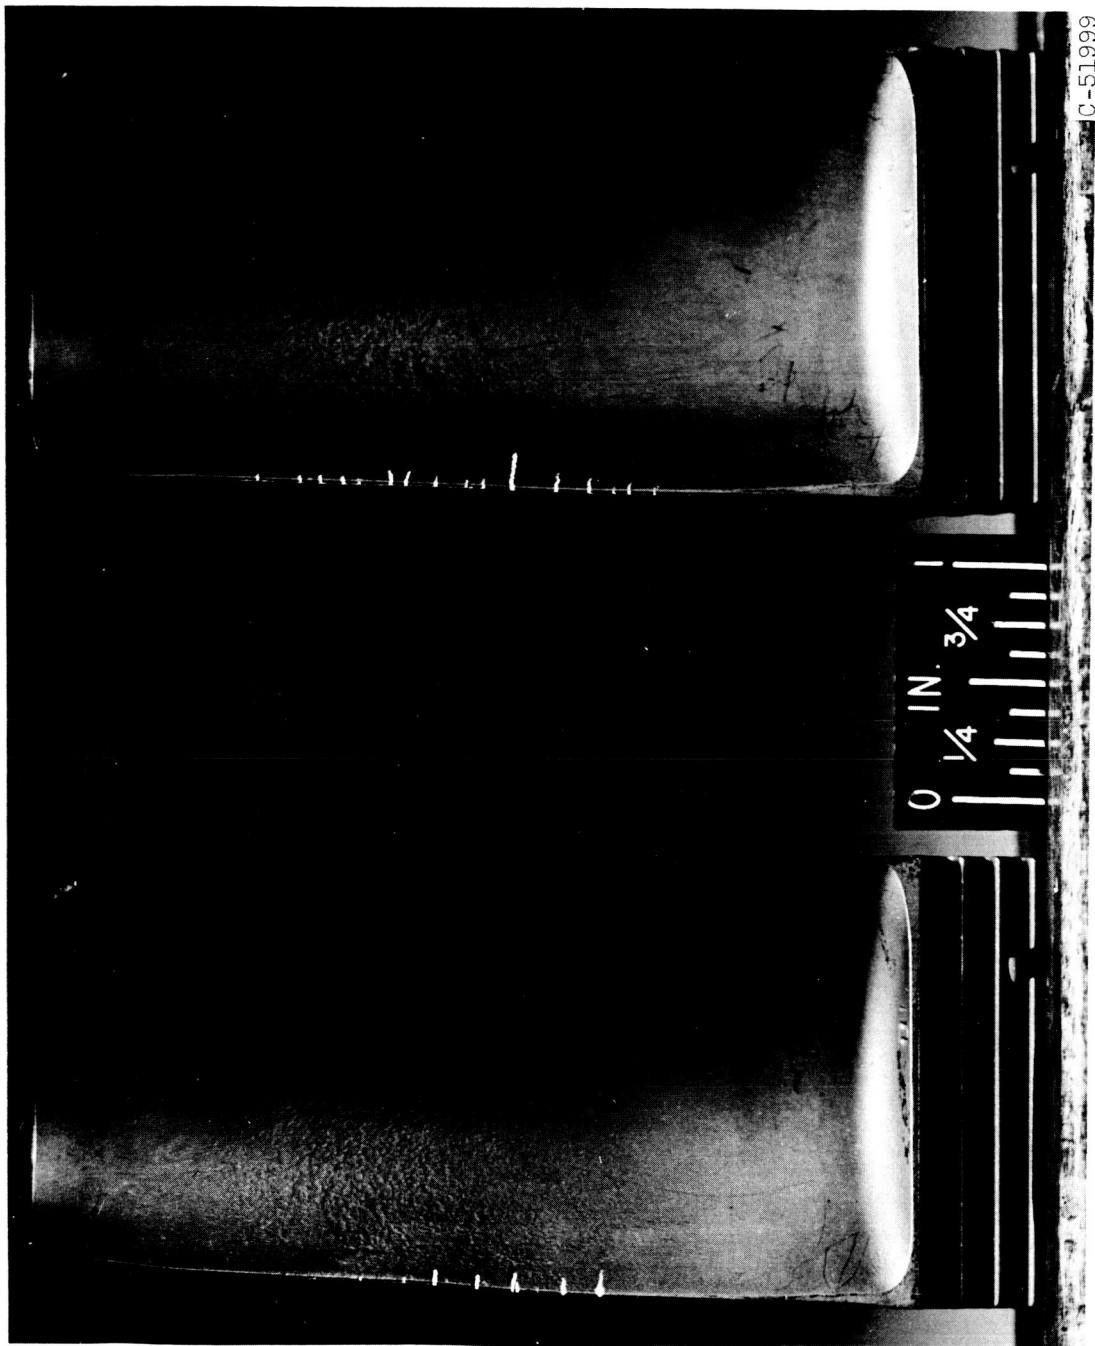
Typical thermal-stress fatigue cracked buckets.
